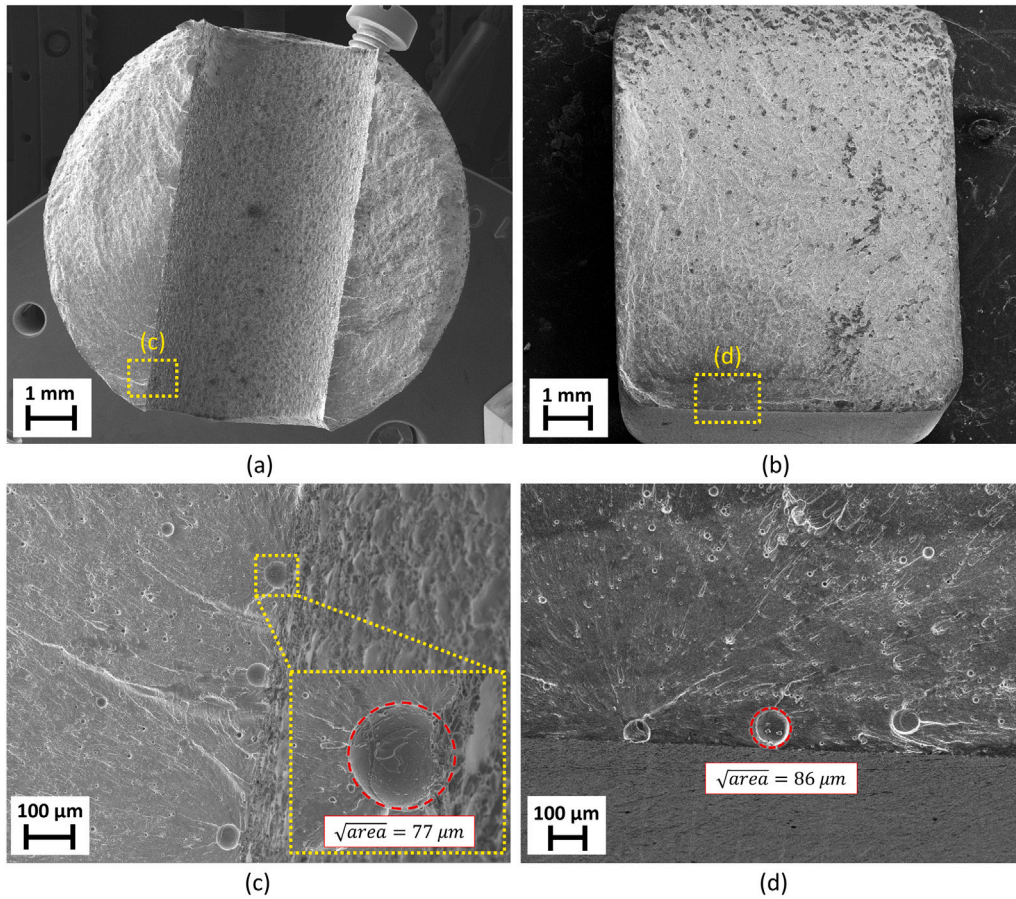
(a) Fractography of specimen HL5. (b) Fractography of specimen WB2. (c) Detail of the killer pore of specimen HL5. (d) Detail of the killer pore of specimen WB2.
